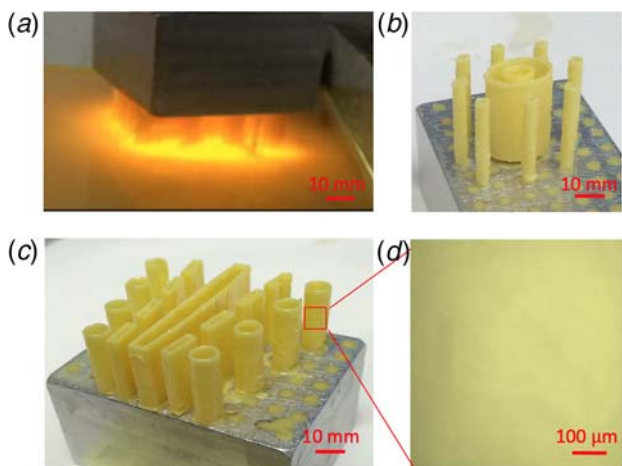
Printed macro-shell using MVP-SL_{CRF} process: (a) the continuous projection light, (b) side view of printed cylinders using MVP-SL_{CRF} process, (c) fabricated umbrella-shaped shell by MVP-SL_{CRF}, and (d) microscope image of the printed surface of umbrella-shaped shell using the MVP-SL_{CRF}
